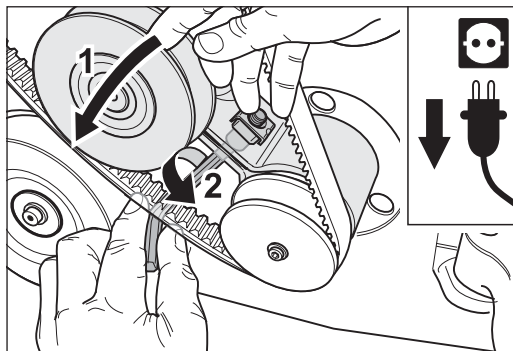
By turning the tensioner, tighten the smaller V-belt (1) and carefully tighten the clamping screw (2).
